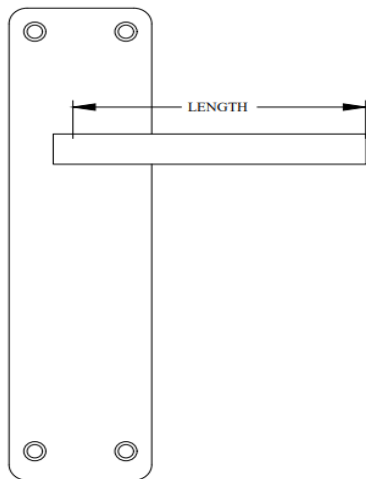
TYPICAL DESIGN OF LATCH DOOR HANDLE COVER PLATE
